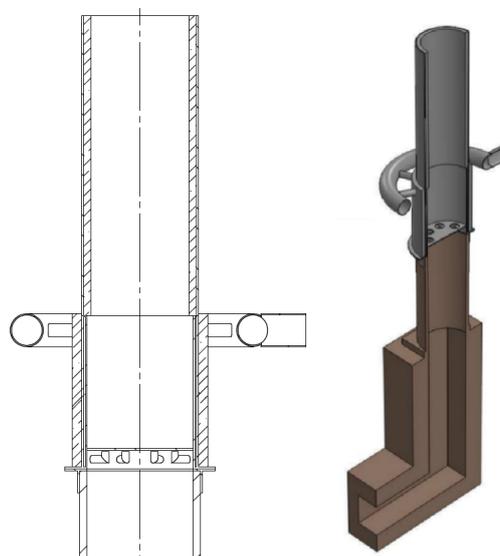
Design of the combustor and proposed set up on top of the chimney. Exhaust air for combustion and suction is inserted in the tube in the right.
